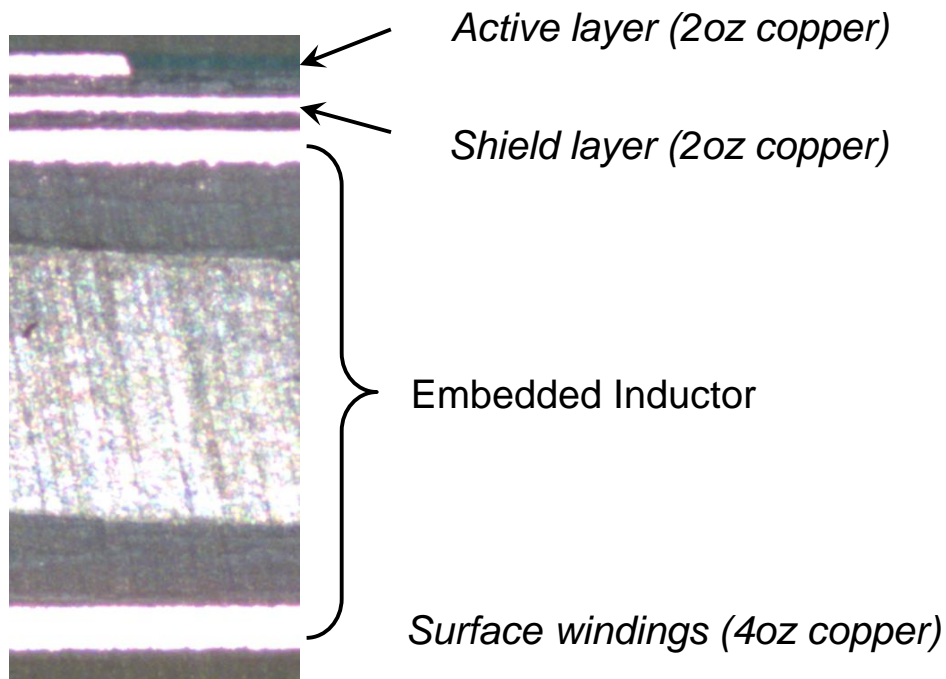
Cross sectional view of the 4-layer PCB with embedded magnetic layer.
